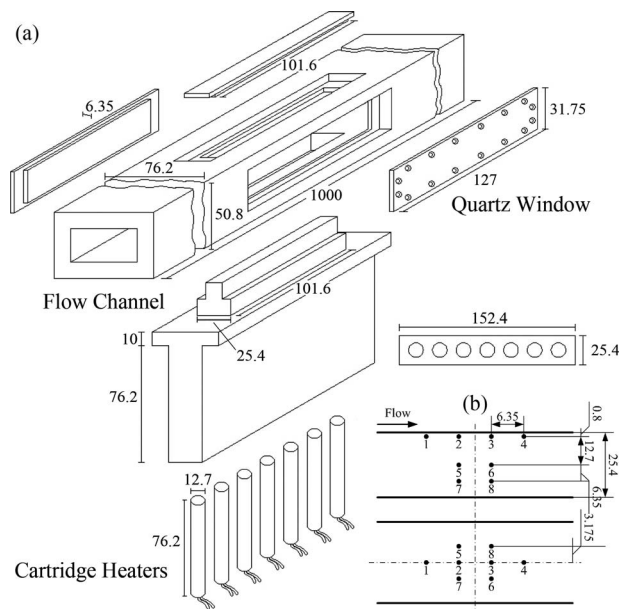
Structural design of the test section: (a) assembly view of the flow channel, the test section, and heaters; and (b) thermocouple locations in the test section
